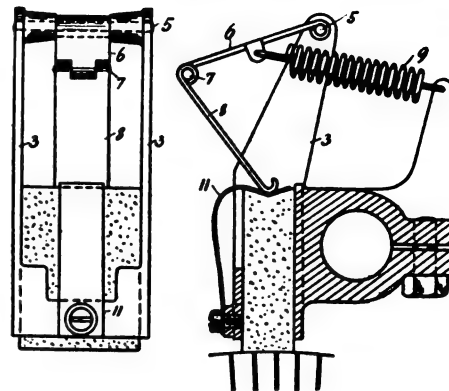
COMMUTATOR BRUSH-HOLDER.
